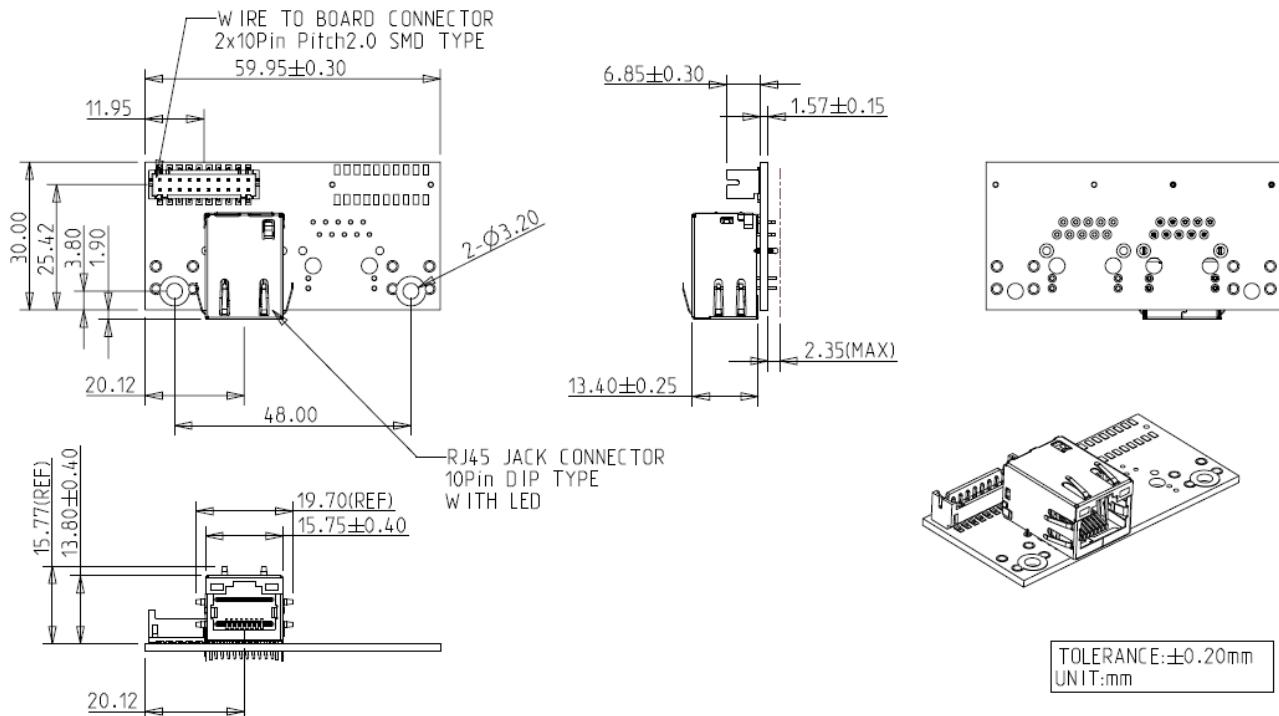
Bracket Daughter Board Drawing (EGPL-G1S1-C2/W2)
